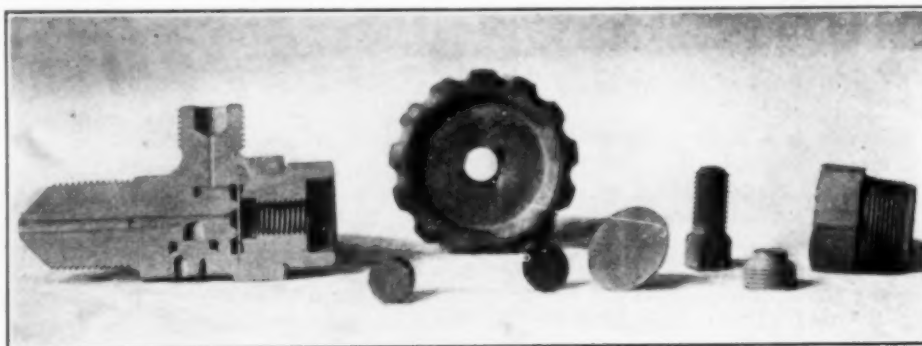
SECTIONAL VIEW AND PARTS OF HIGH-PRESSURE GAS VALVE
